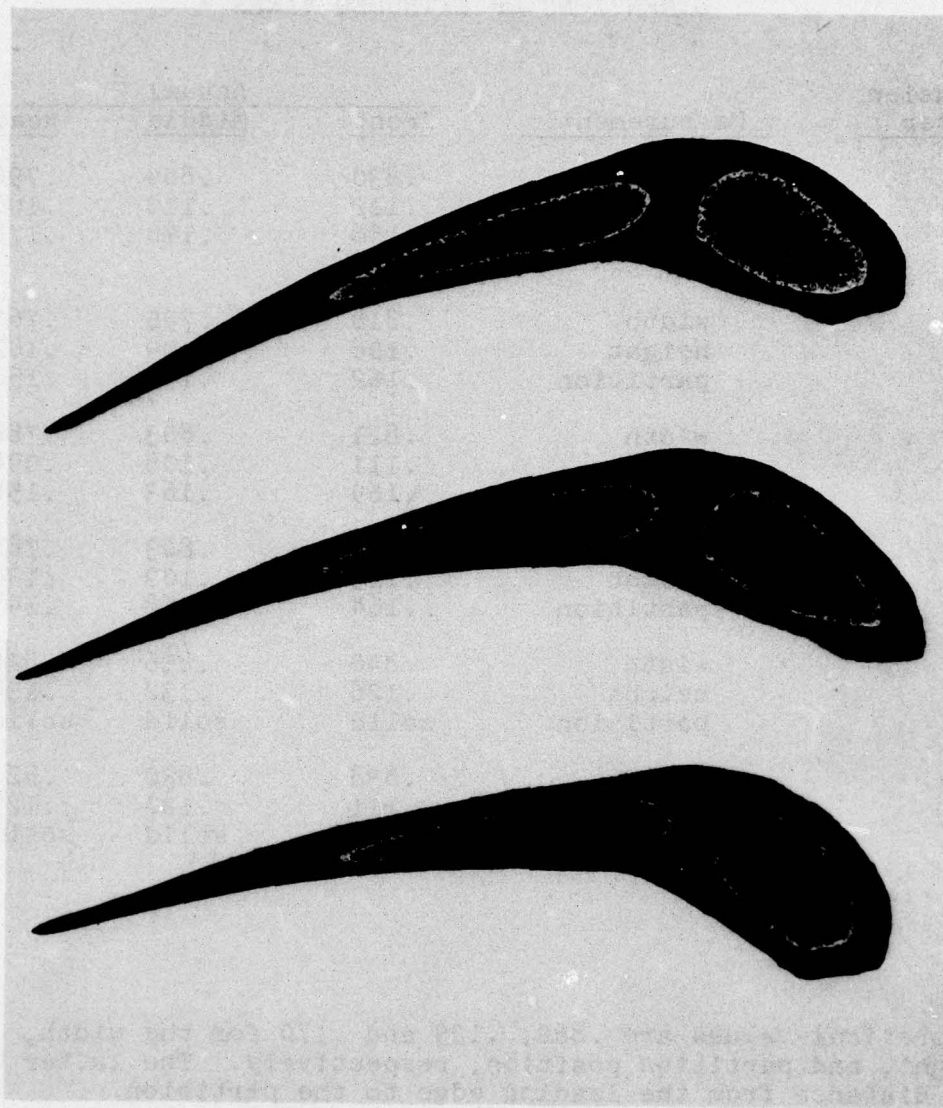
CROSS SECTION OF EXTRUDED HOLLOW VANE
